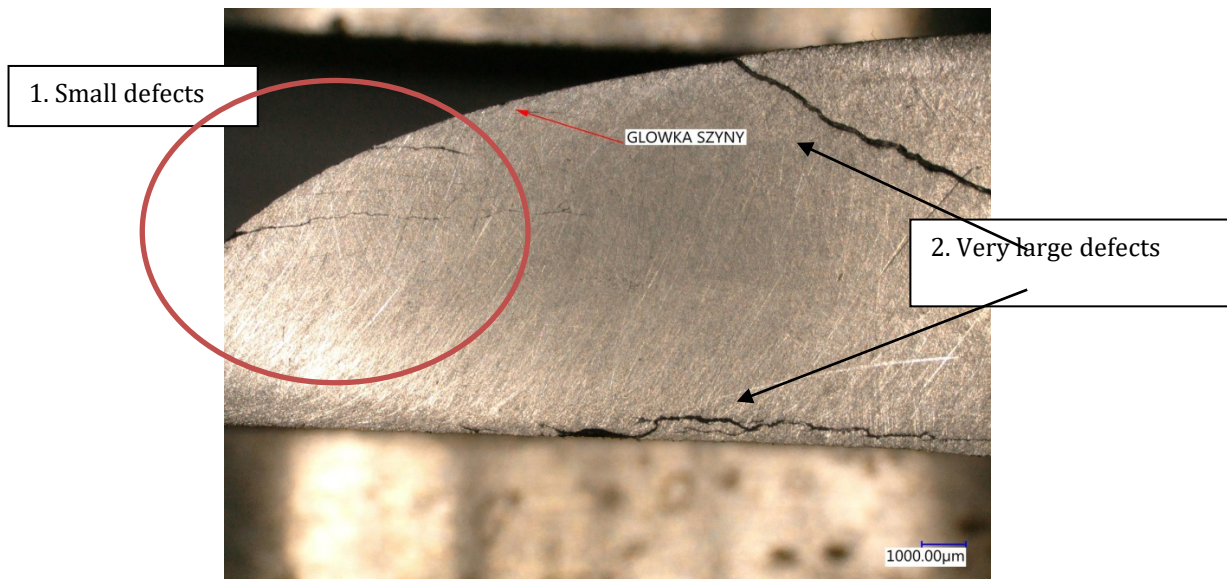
Head checking occurring in the rail head - cross section (microscopic observations).
